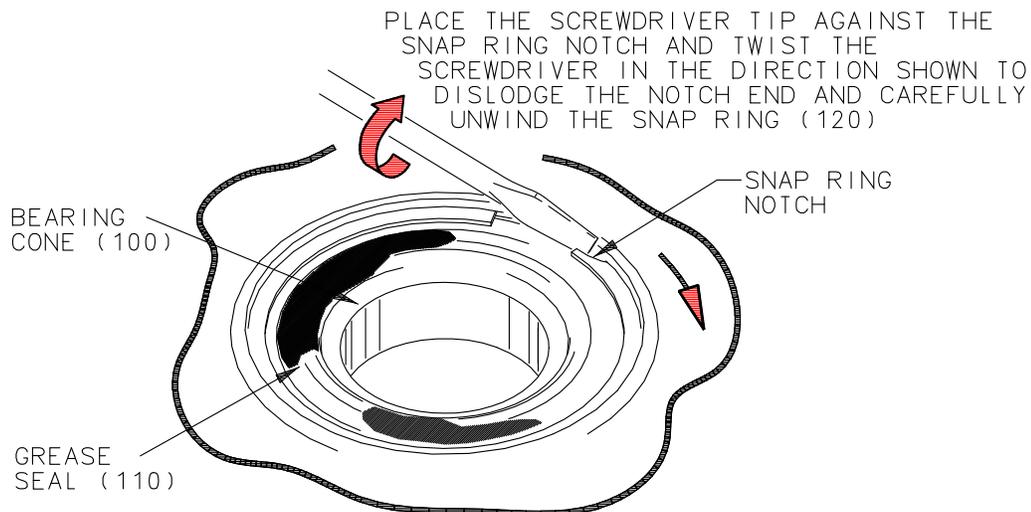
Snap Ring Removal – Inboard Wheel Half Shown
